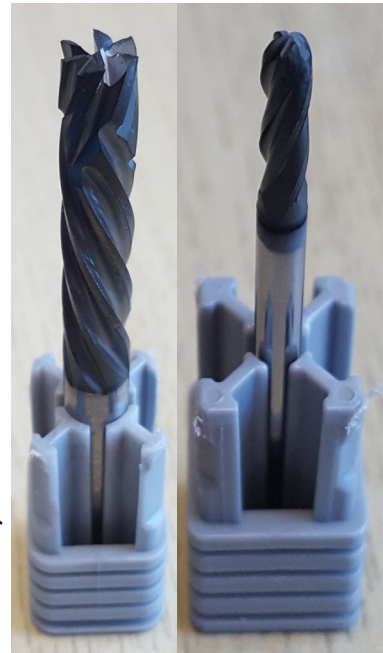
Compression spiral (left) and ball end mill (right) cutters
